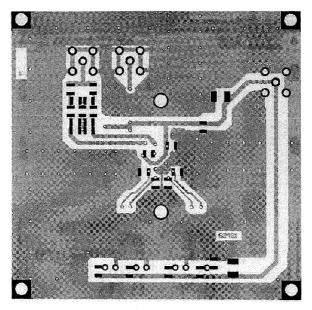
UAA2077XM Demo Board - Layer 2 Layout
